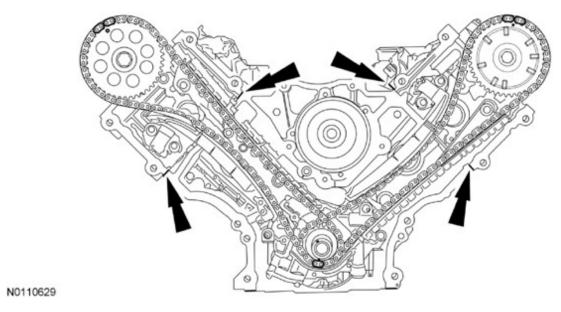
Locating Alignment Marks Courtesy of FORD MOTOR CO.
